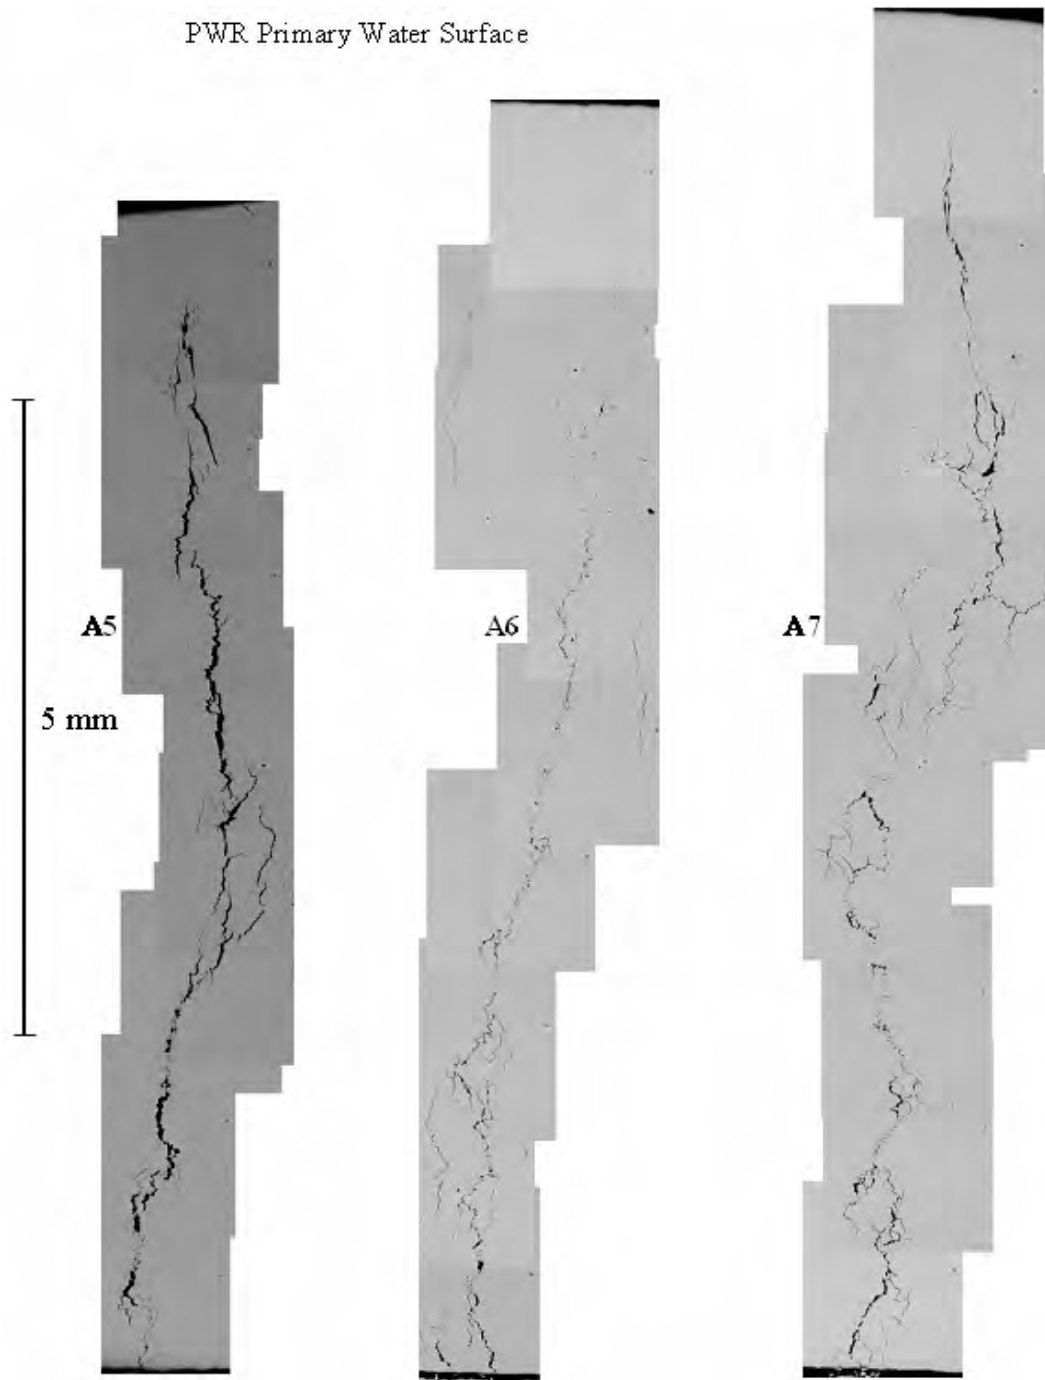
Macro Cracks in Several Cross-Section Samples from Piece A Shown Through Photography. Note that PWR primary water surface is now on the top side of these images.
